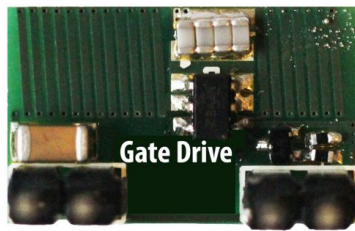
Top side of prototype with PCB inductors (10x16mm PCB)
